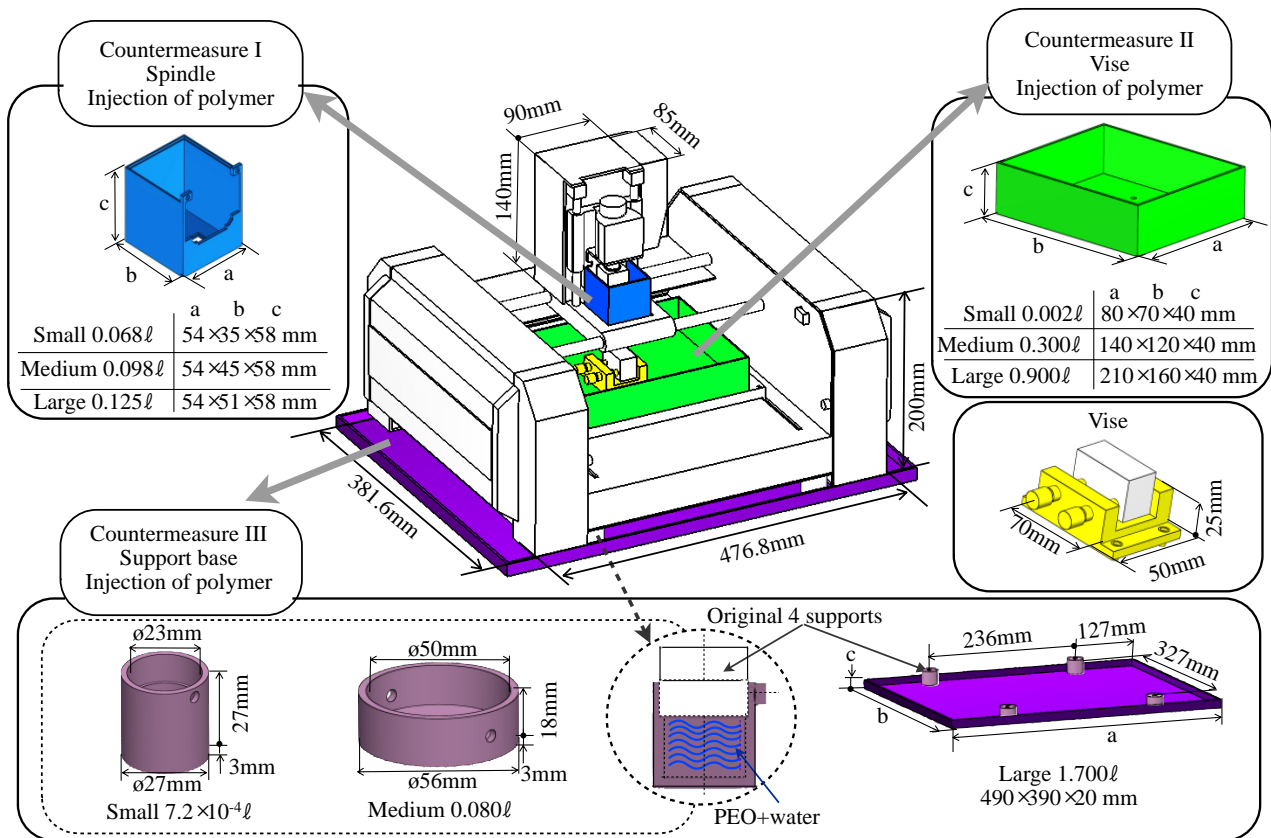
Schematic view of the small milling machine with 3 countermeasures for noise and vibration
